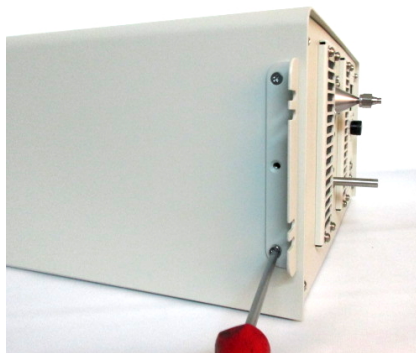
The rack mount bracket is installed to each side using three countersink screws.
